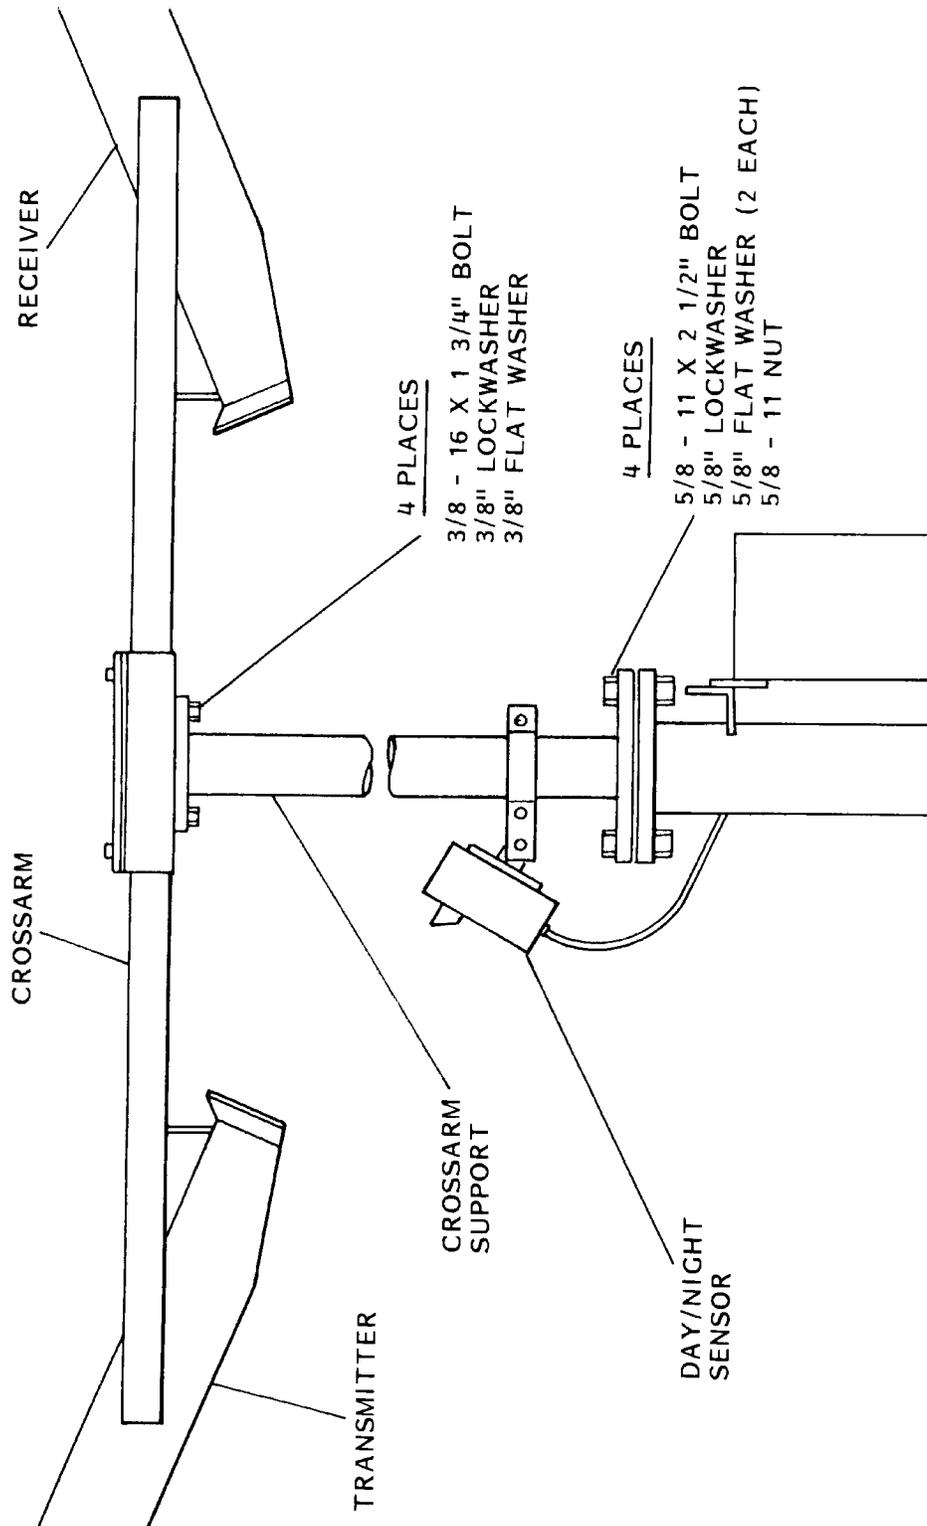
Crossarm/Support and Day/Night Sensor Installation
